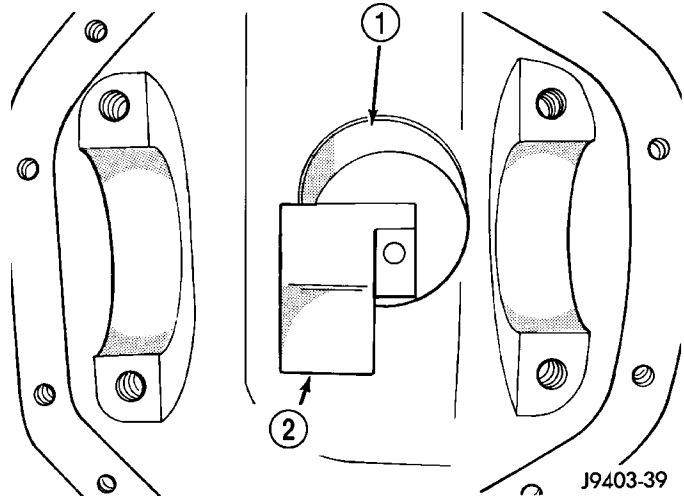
PINION GEAR DEPTH GAUGE TOOLS
